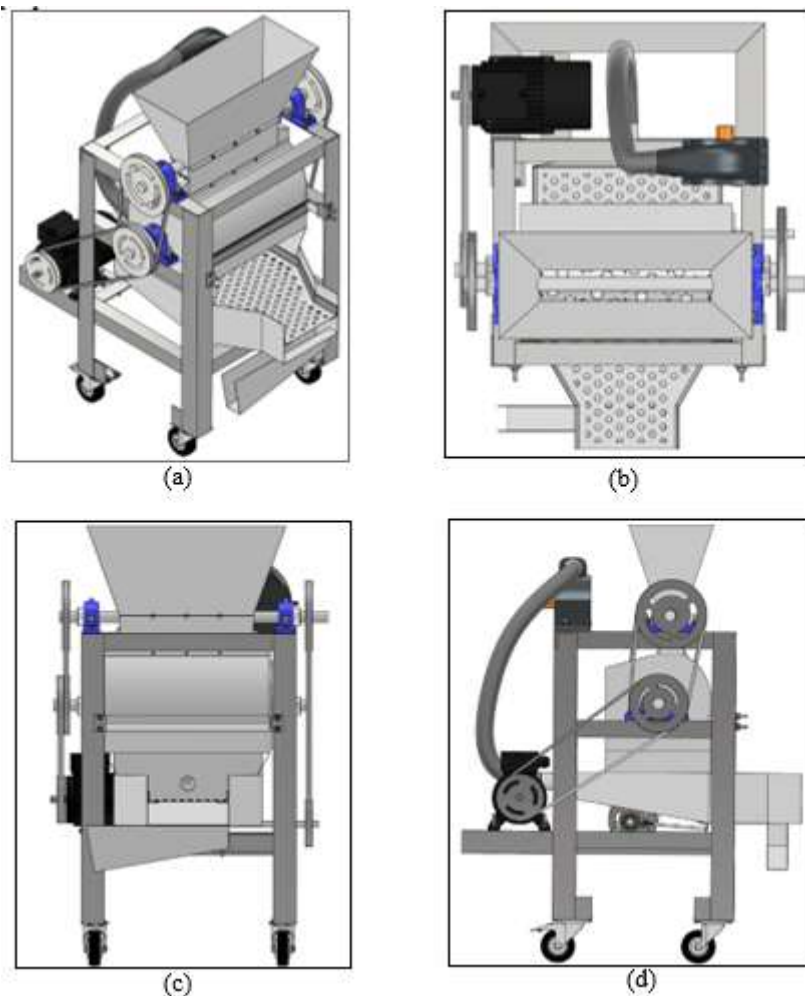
Machine Drawing from different perspective (a) isometric view (b) top view, (c) front view, (d) side view
